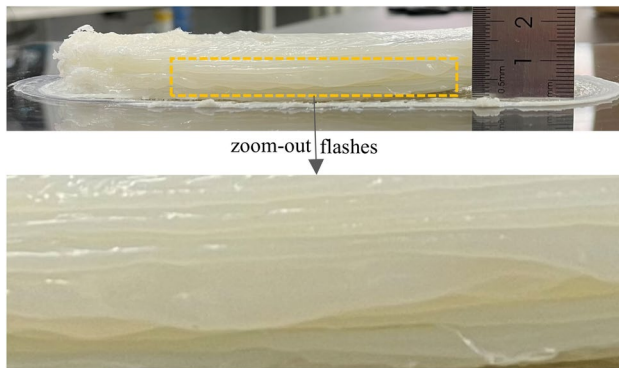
Lateral view of the specimen, in which edge flashes could be observed
